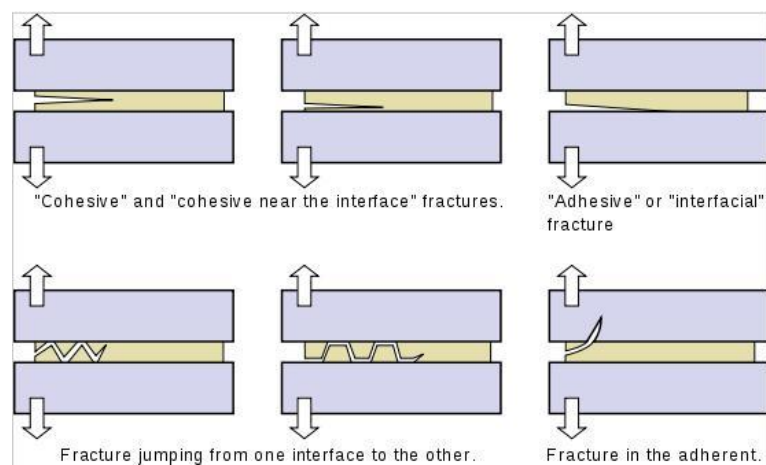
This diagram shows typical adhesive joint failure mechanisms. [26].
